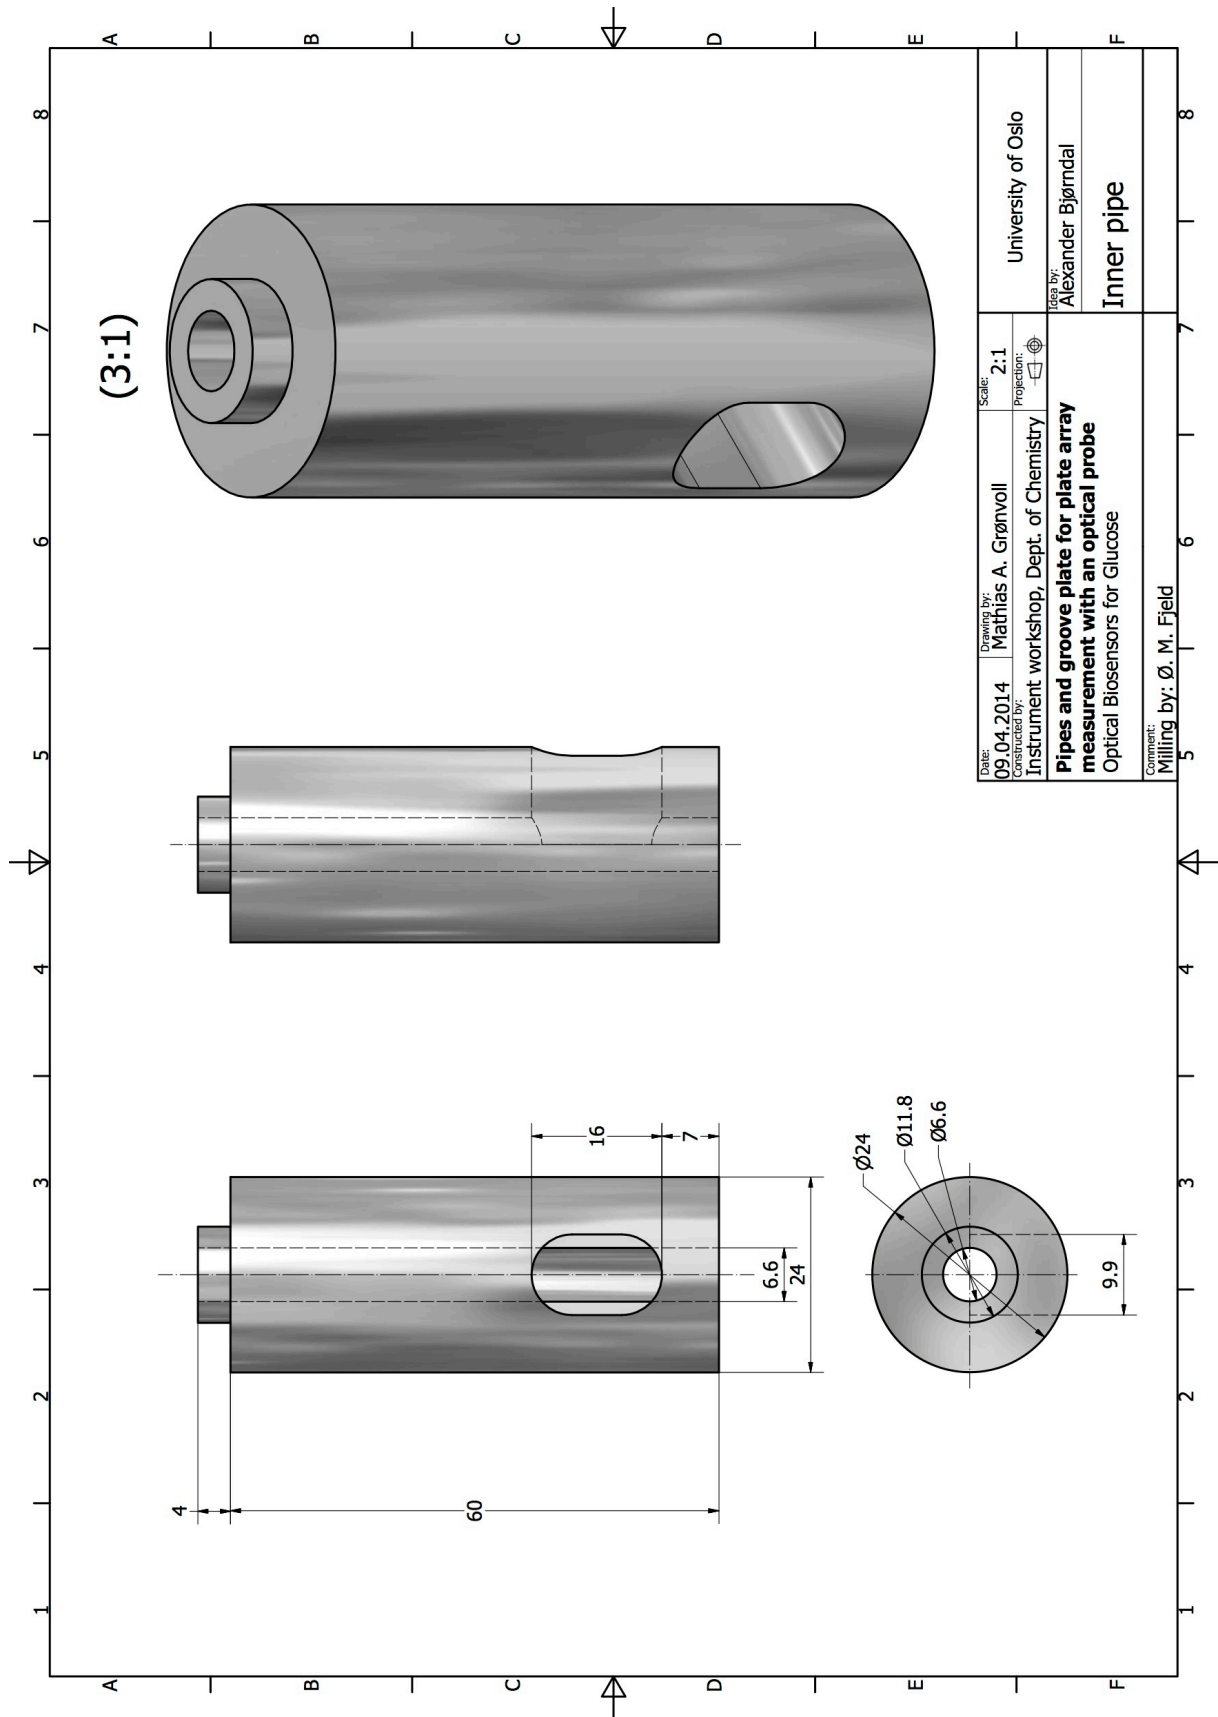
Inner pipe used in the setup for plate array measurement with groove plate and pipes.
